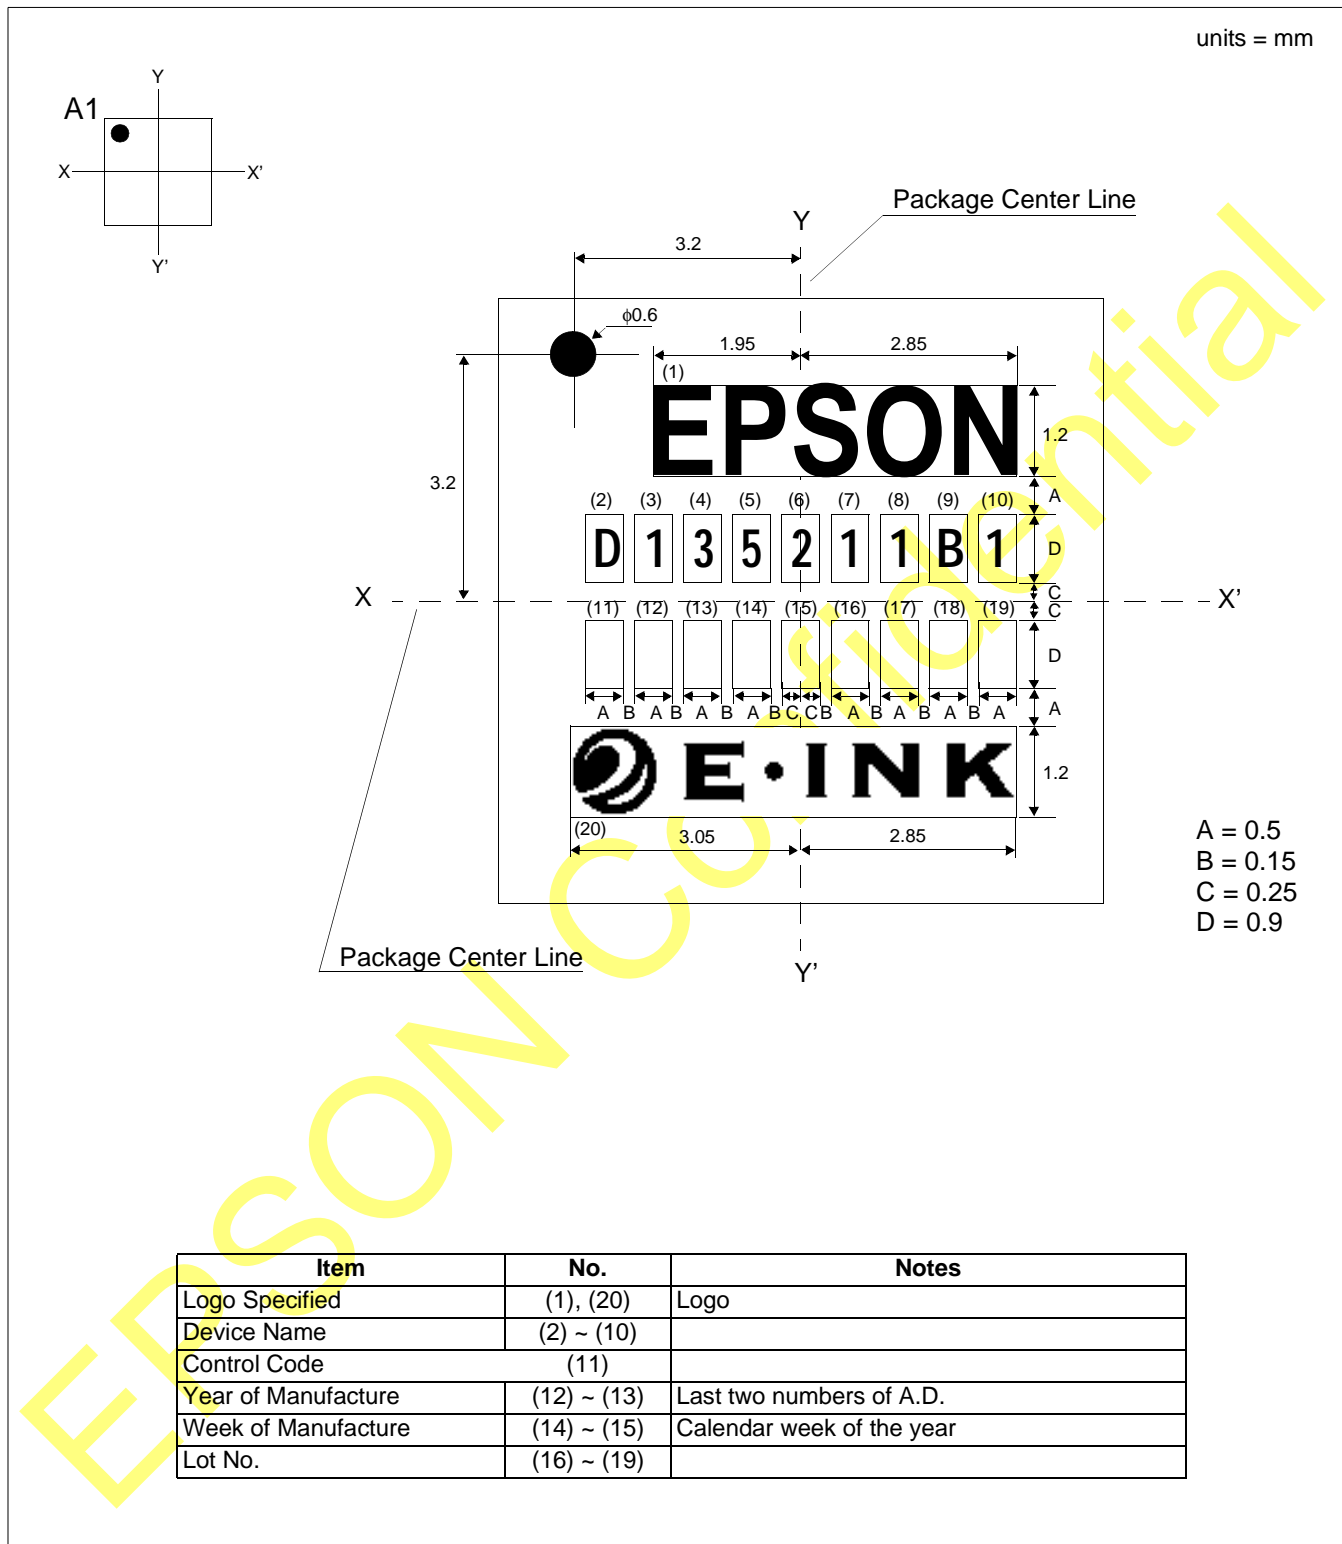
S1D13521 PFBGA8UX 181-pin Package Marking
